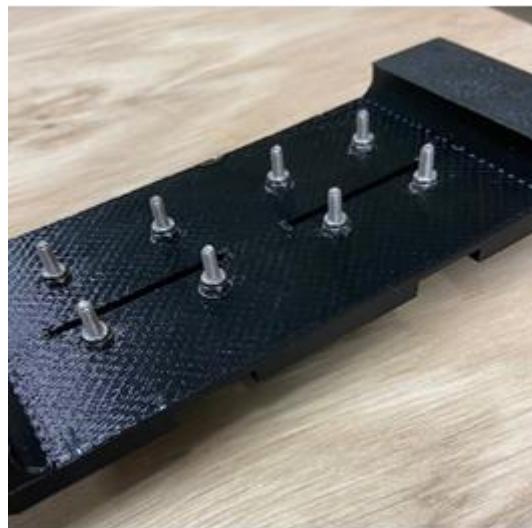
Opposite side of boom mount plate with pillow bearings secured.
